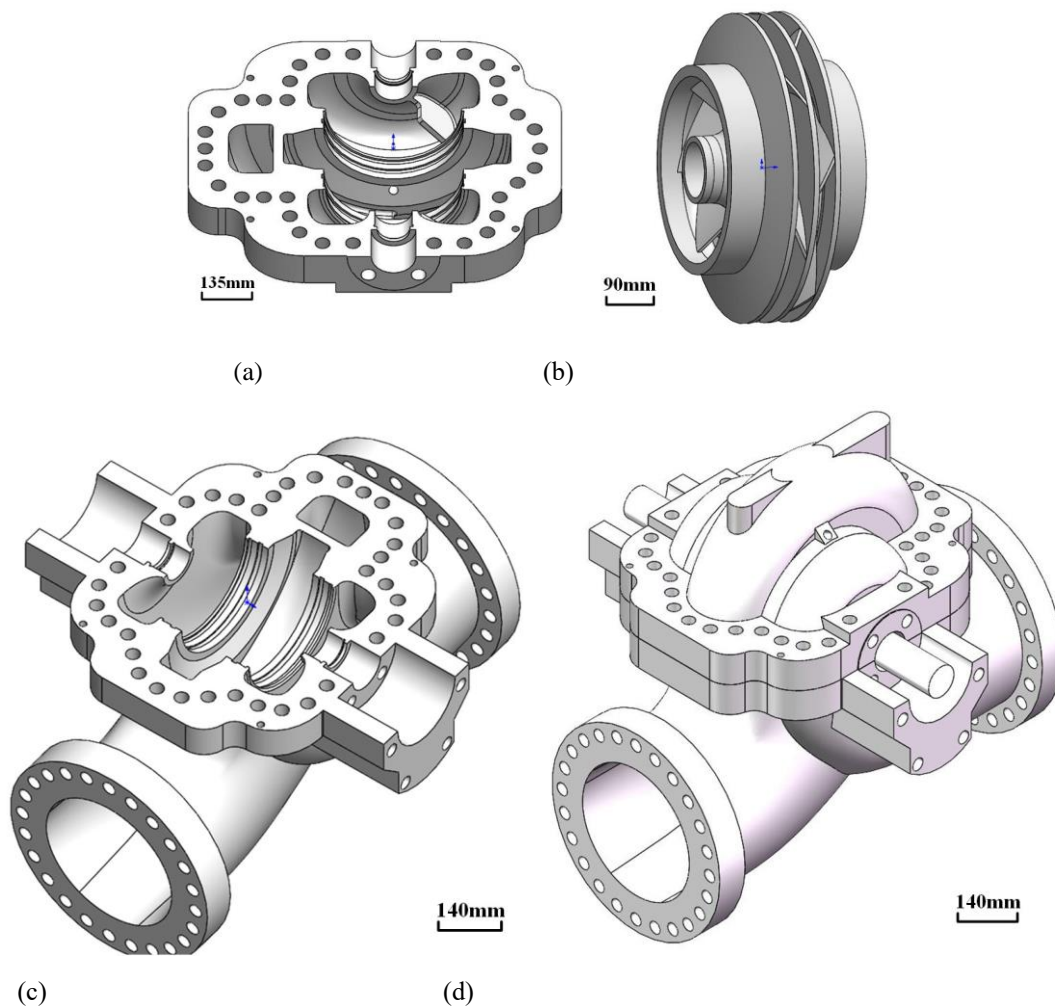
Part of Sulzer pump drawings (a) Cross-section view of Sulzer pump (b) Sulzer pump assembly
